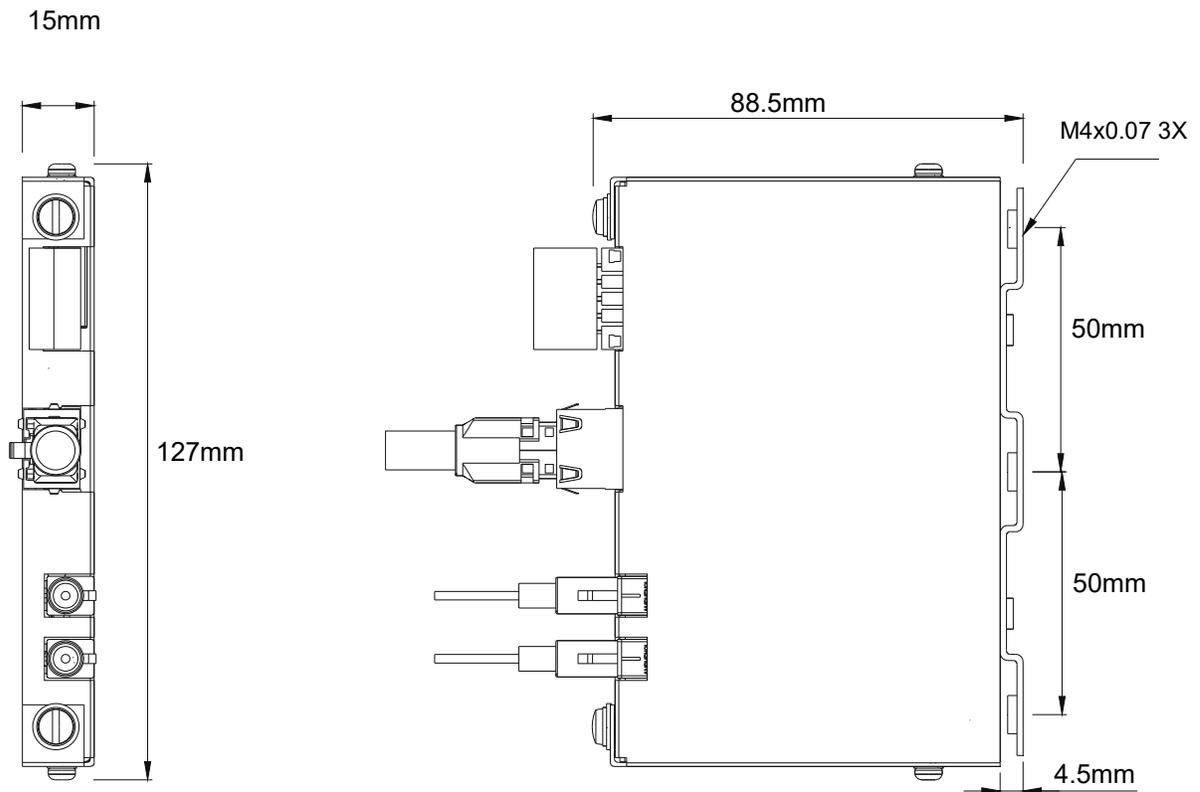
Line Drawing of CRE1 Flow Transmitter.
